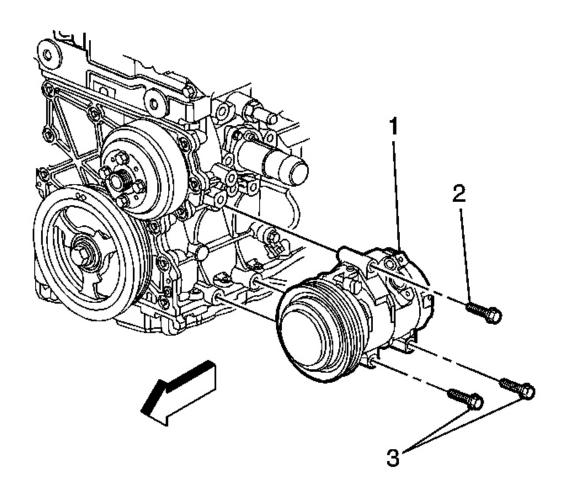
View Of A/C Compressor Courtesy of GENERAL MOTORS CORP.
